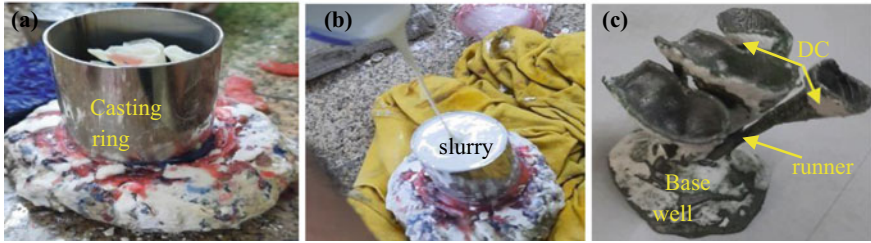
a Thermoplastic pattern inside the casting ring, b Pouring of investment slurry into the casting ring, c Cast metallic DC after breaking investment
